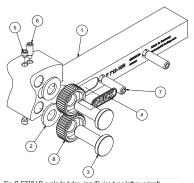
F712-LD exploded drawing (Swiss-type lathe variant)
